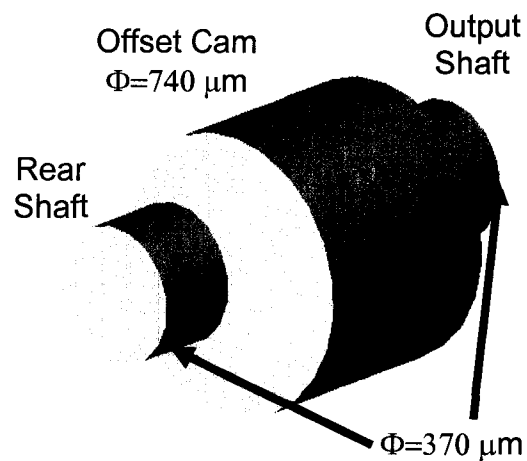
Sketch of round shaft design for the 2.4 mm engine.
